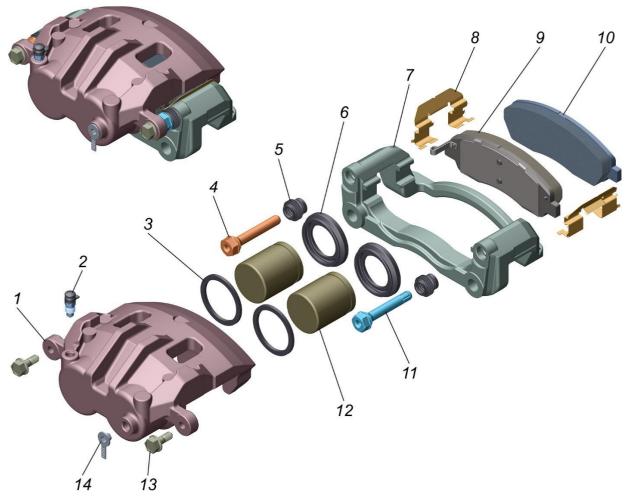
Rear brake composition: 1 – brake caliper body; 2 – bypass valve with cap; 3 – O-ring; 4 – upper guide pin; 5 – pin boot; 6 – piston protective cap; 7 – brake caliper base; 8 – brake shoe springs; 9 – internal brake shoe assembly; 10 – external brake shoe assembly; 11 – lower guide pin; 12 – piston; 13 – guide pin bolt; 14 – protective plug;
